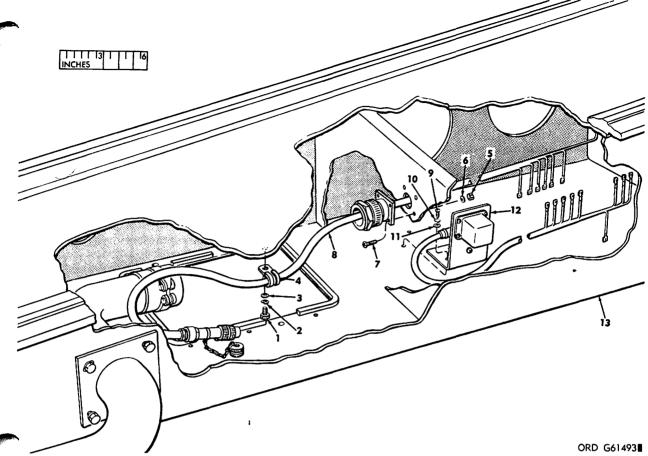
Guidance set cooling system cable assembly and blower relay — removal and installation.
